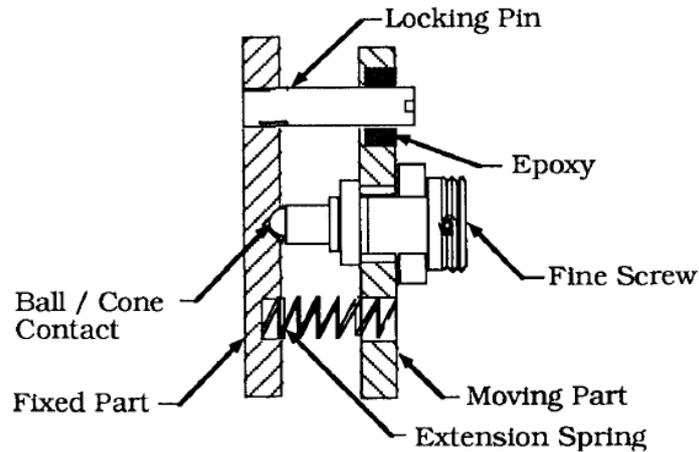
A linear mechanism with a ball/cone interface, epoxy locking and extension spring preloading
